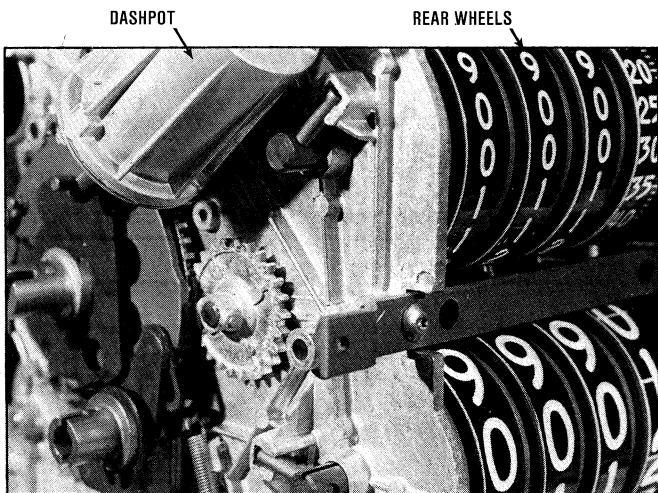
Rear wheel shaft pins inside but approximately even with the edge of their slots.
